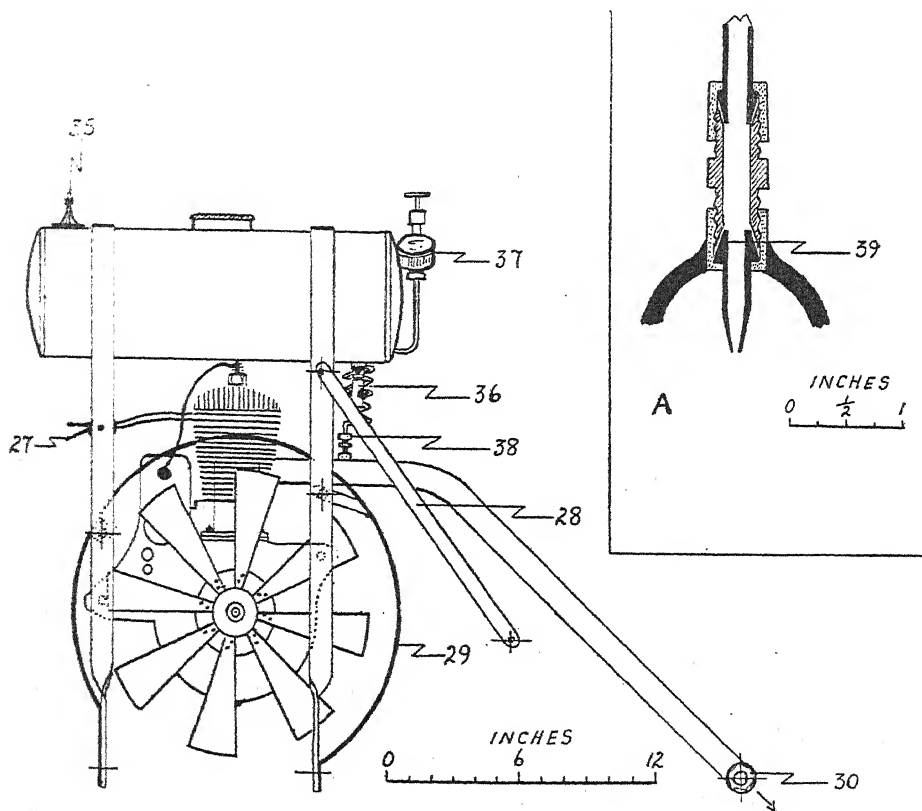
Side elevation of engine, nicotine and exhaust assembly. A. Vertical section through nicotine injector.
